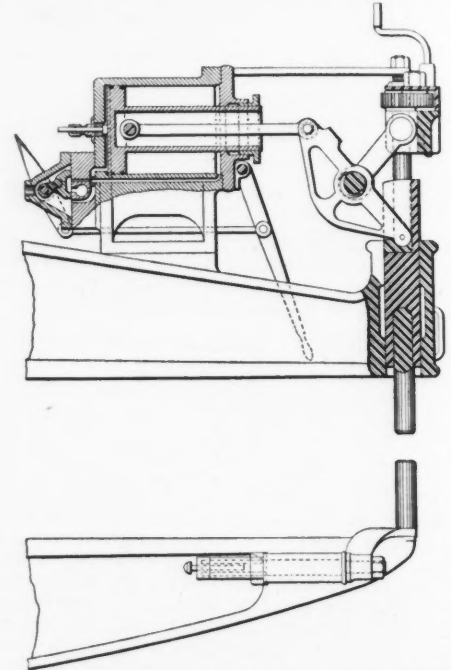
Section of Cylinder, Valves, etc., Showing Details of Eccentric Toggle Joint.
